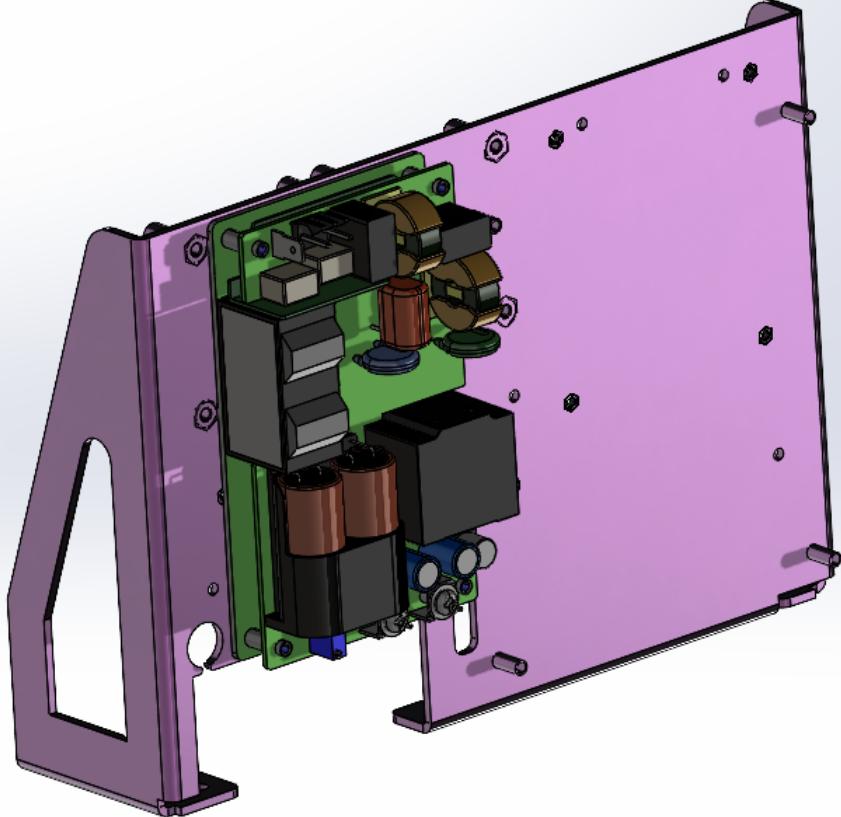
Mounting AC/DC Converter to Electronics Bracket
